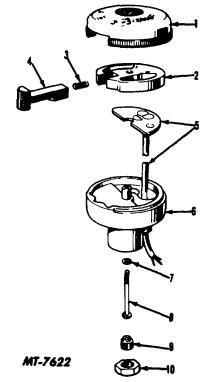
Type "B" Control Switch (Exploded View) Legend for Fig. 20
